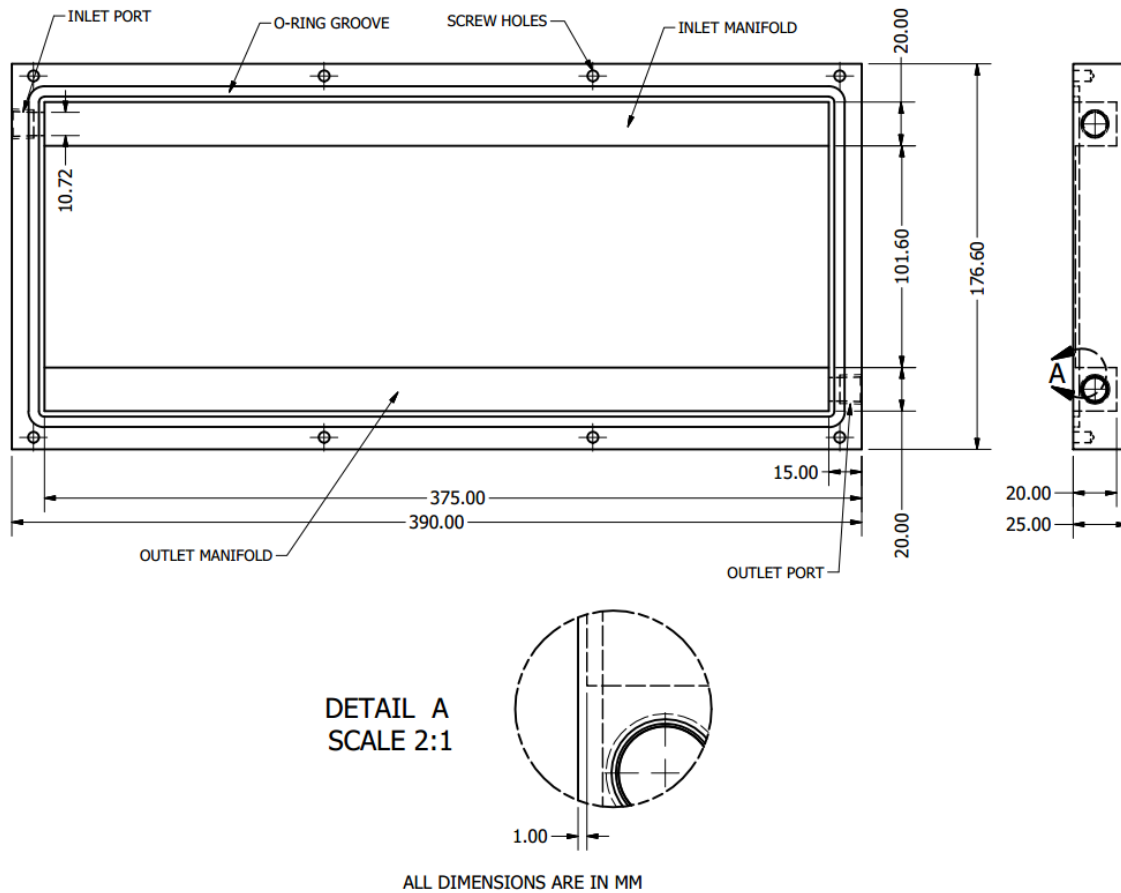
A CAD drawing showing acrylic base dimensions. Detail A shows the undercut surface for accommodating the minichannels.
